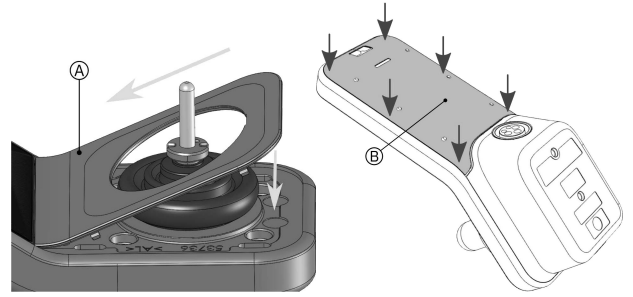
Re-attach the joystick decorative cover and back cover
